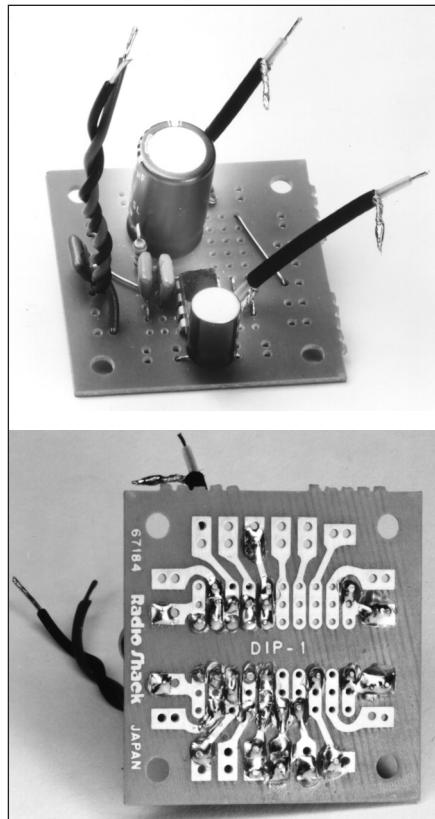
The audio amplifier built on a multipurpose PC breadboard. Top view at A; bottom view at B.
